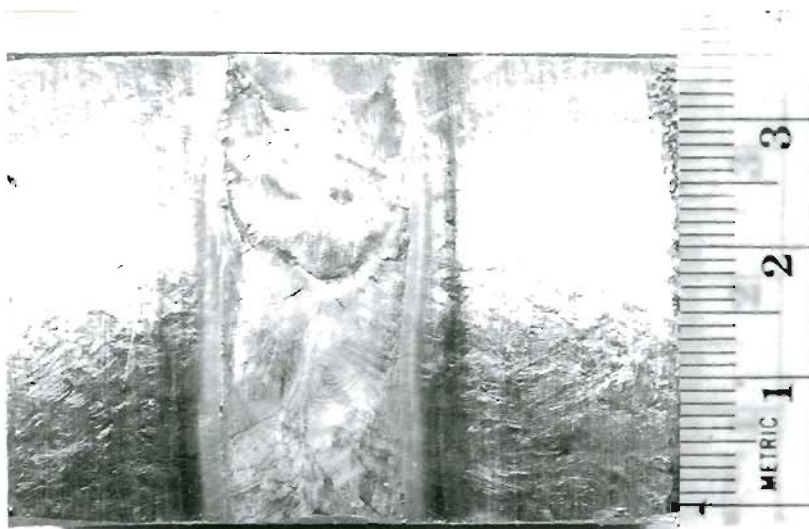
A specimen removed from the vareststraint test bar for the examination of cracks in the weld metal and the HAZ.
